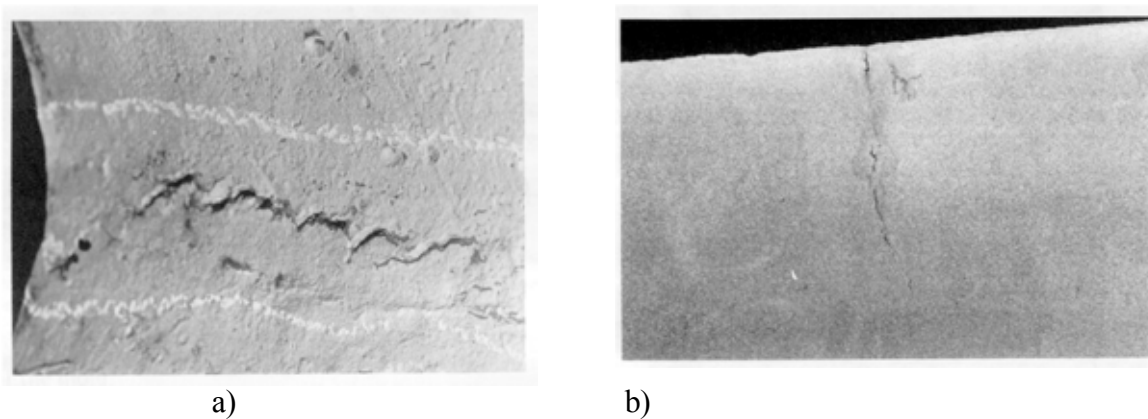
(a) *Illustrates hot tearing in steel castings* (b) *Section through a hot tear, in steel casting.
